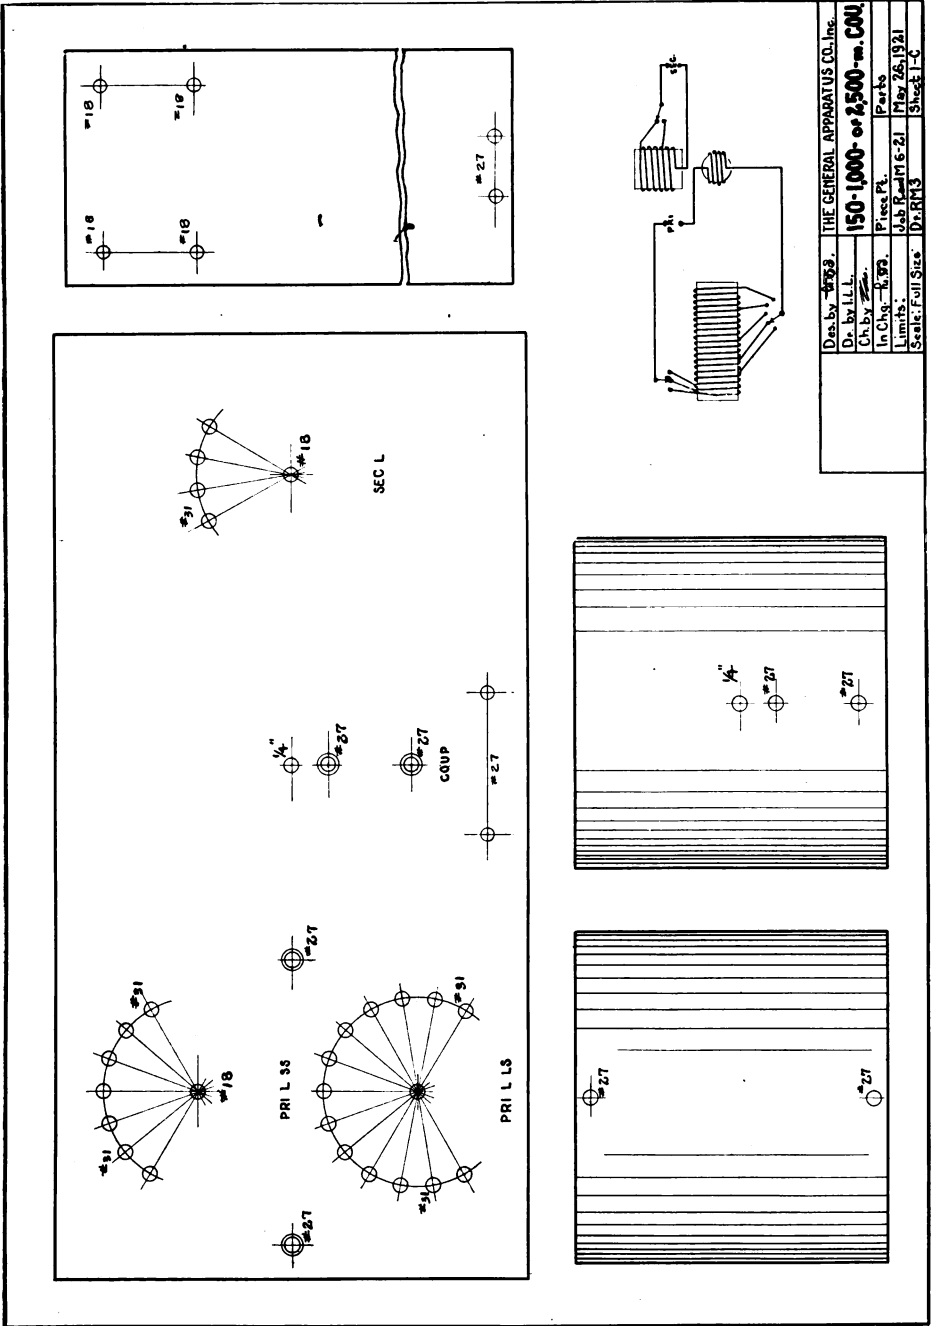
Front and rear views of the panel control loose coupler with rotating ball coupling adjustment.
